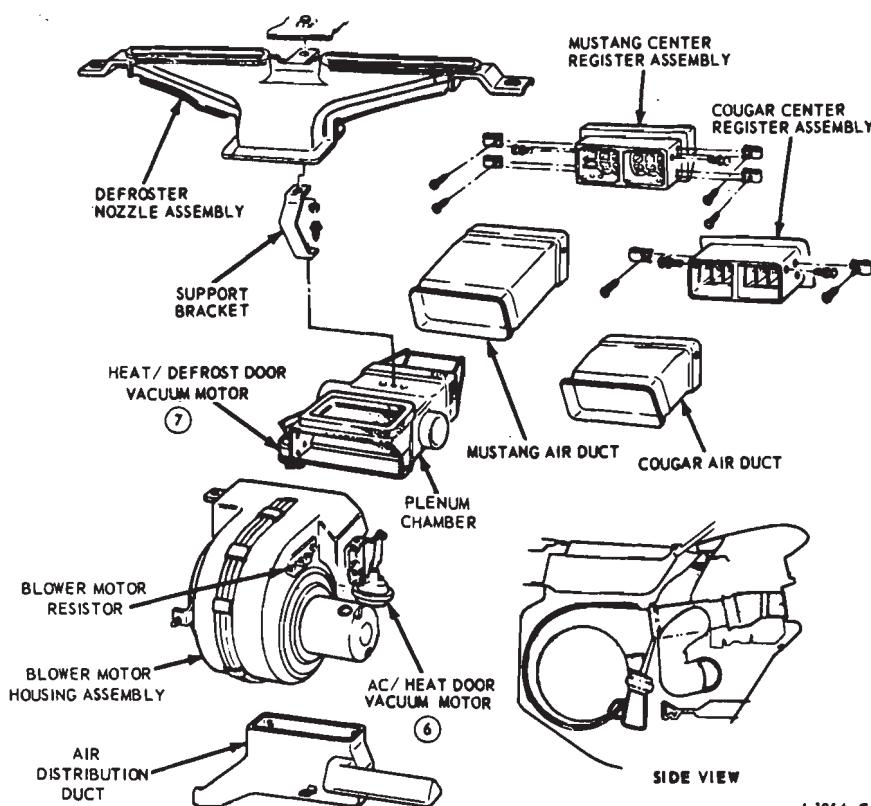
Heater-Air Conditioner—Mustang and Cougar
